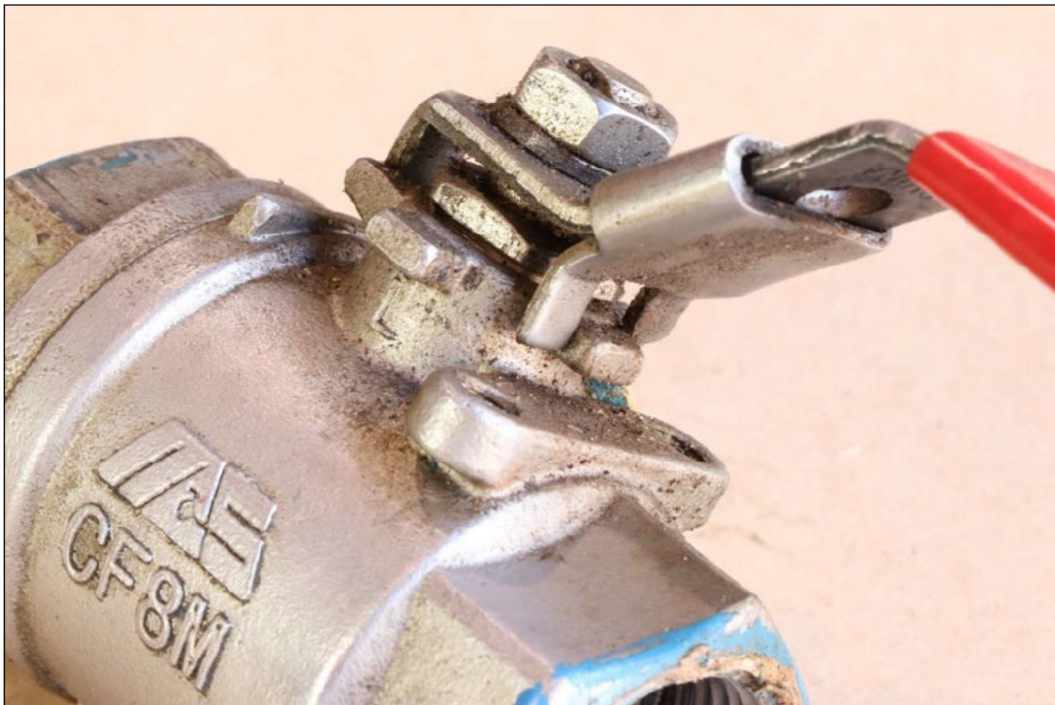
View of deformed locking tab showing deformation preventing proper sliding and positioning of the locking tabs; however, the valve can be opened and closed normally.
